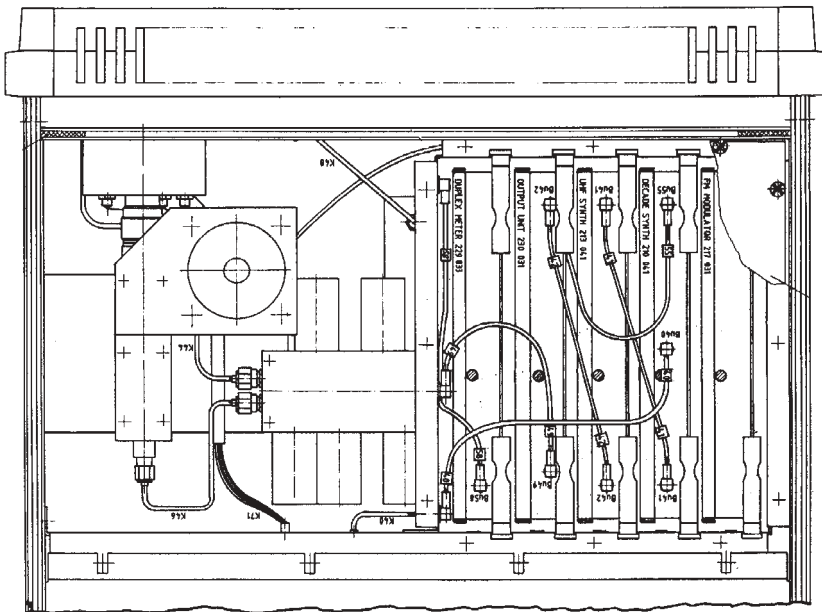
Partial view of chassis with bottom half of shell and cover plate removed. Cables 40 and 49 have to be undone to install the duplex stage.
